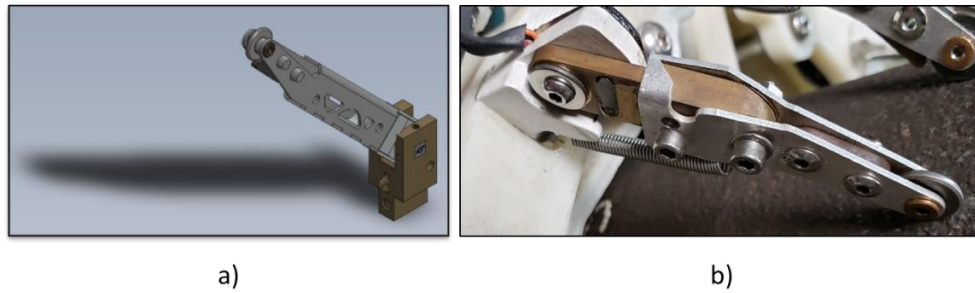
26: In a) design of the geometric sensor to be used in the prototype and in b) geometric sensor mounted to be used in the prototype.
